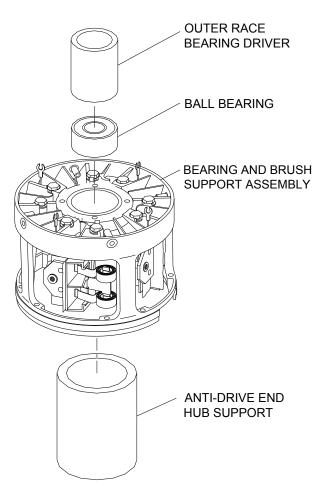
Anti-Drive End Ball Bearing Installation into Bearing and Brush Support Assembly
